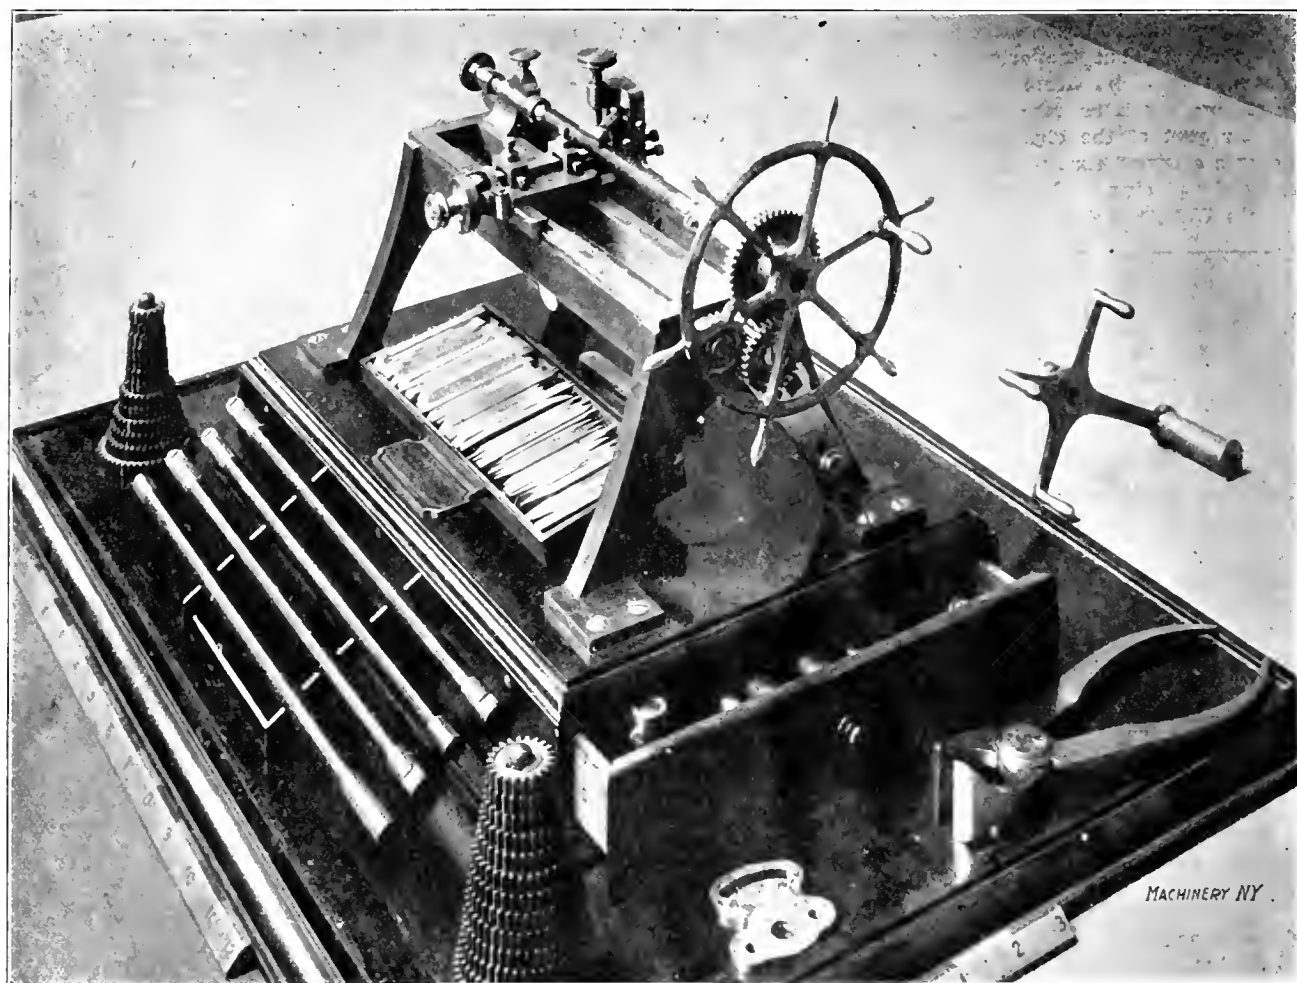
Maudslay Screw-cutting Lathe, about 1800, South Kensington Museum
